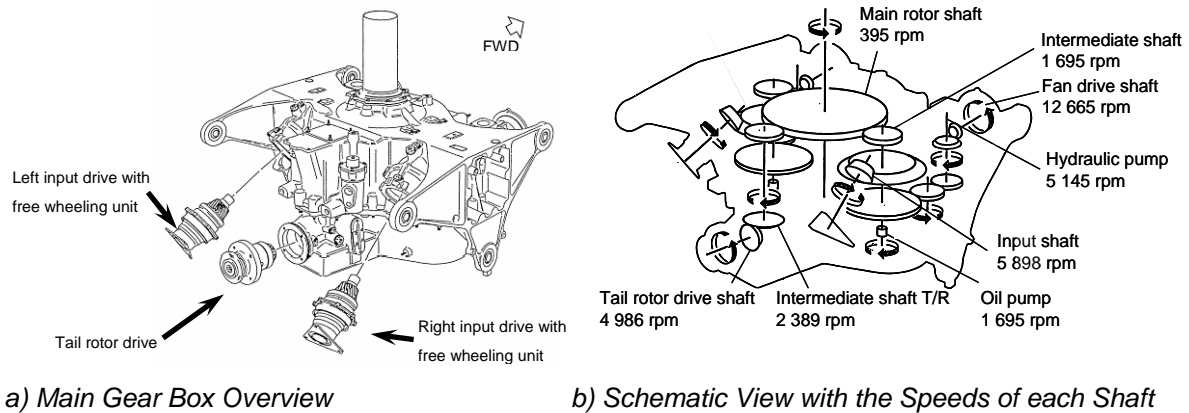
EC 135 Main Gear Box Design and Drive Train Lay Out
